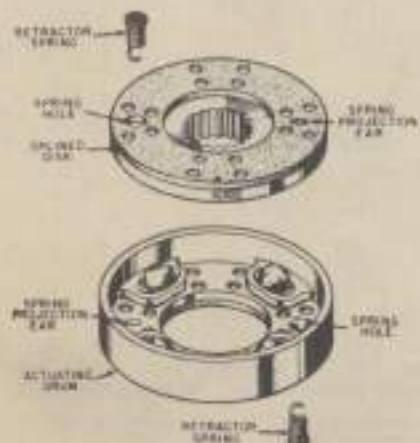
Exploded view of late D-17 brake drum and disc assembly.
